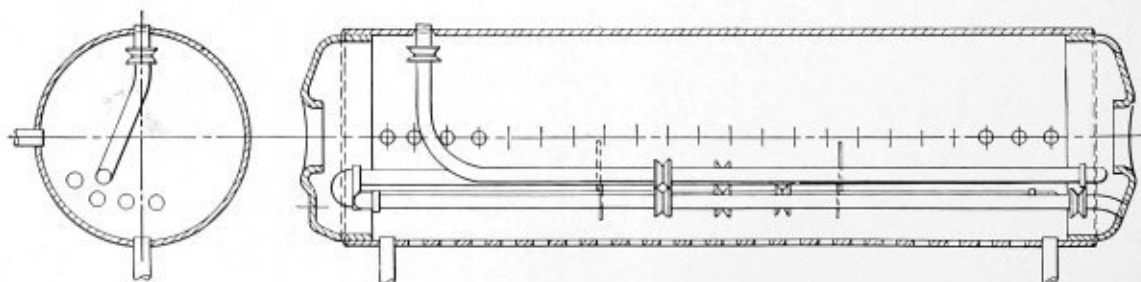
Coil type of convection desuperheater located in boiler steam drum for supplying auxiliary steam
